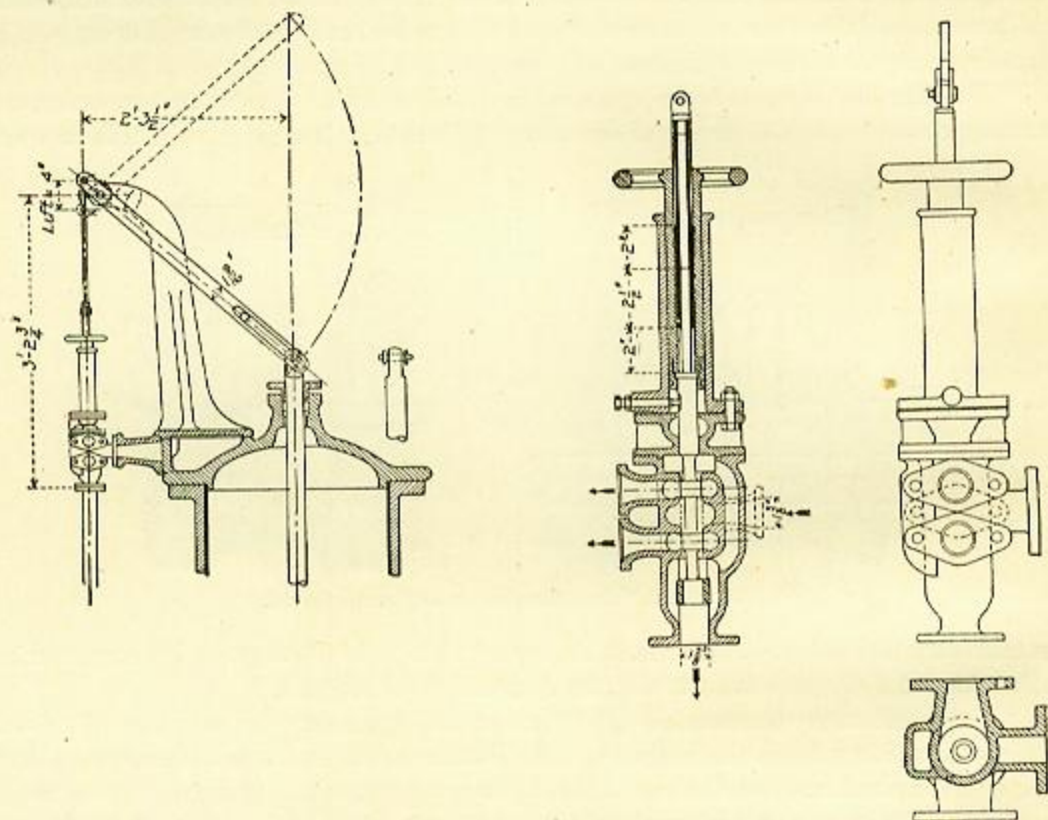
Piston Regulating Valve for Hydraulic Cylinder Operating Gate Valve.
